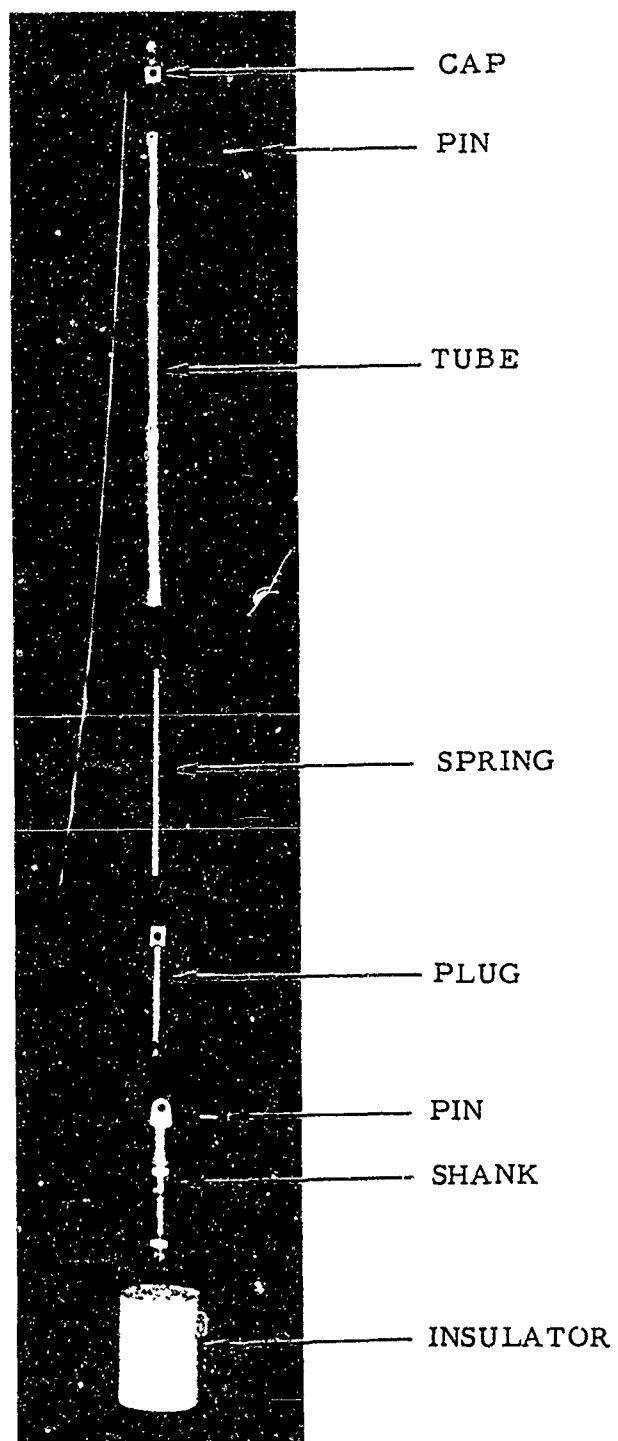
Typical Disassembled 421-449 MC Antenna
